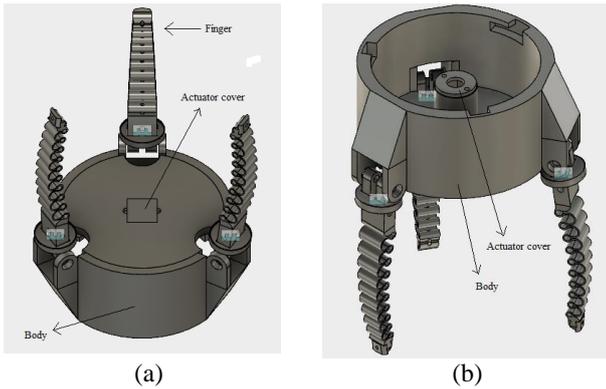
3d design of the first assembly of the under actuated gripper: (a) Top view; (b) Bottom view
